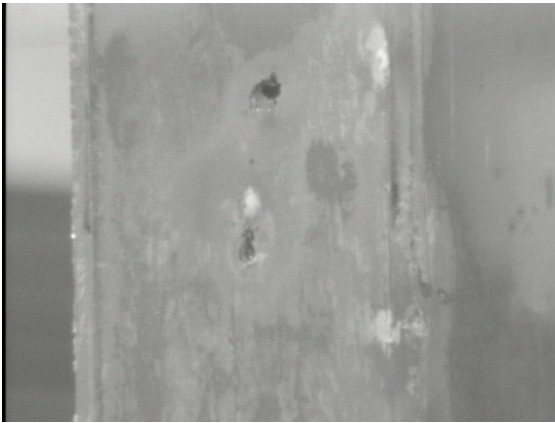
Pits through the clad on outside fuel plate of fuel Materials Test Reactor equivalent design assembly.
